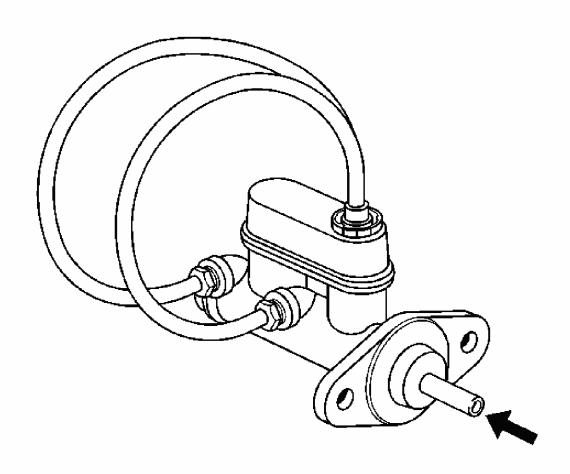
Bleeding Master Cylinder Courtesy of GENERAL MOTORS CORP.
